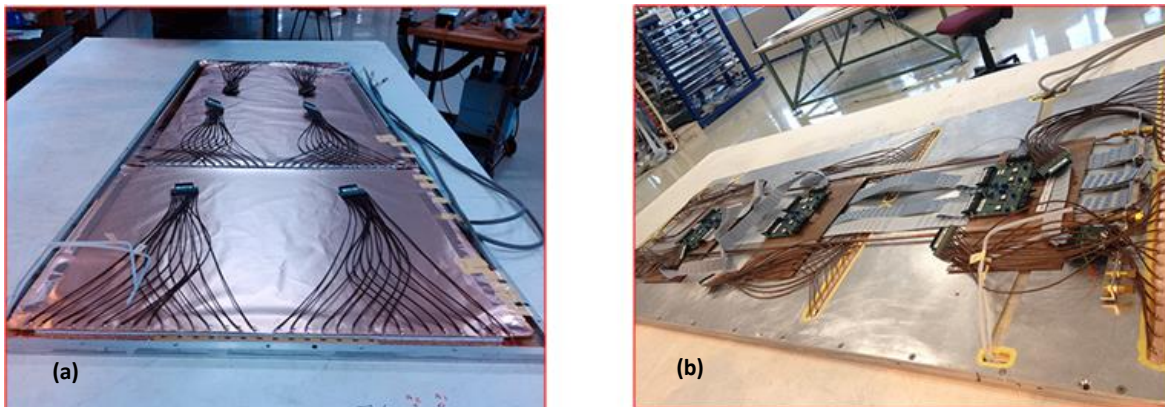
Chamber assembly – soldering signal cables (a) and closing the chamber with aluminium cover (b).
